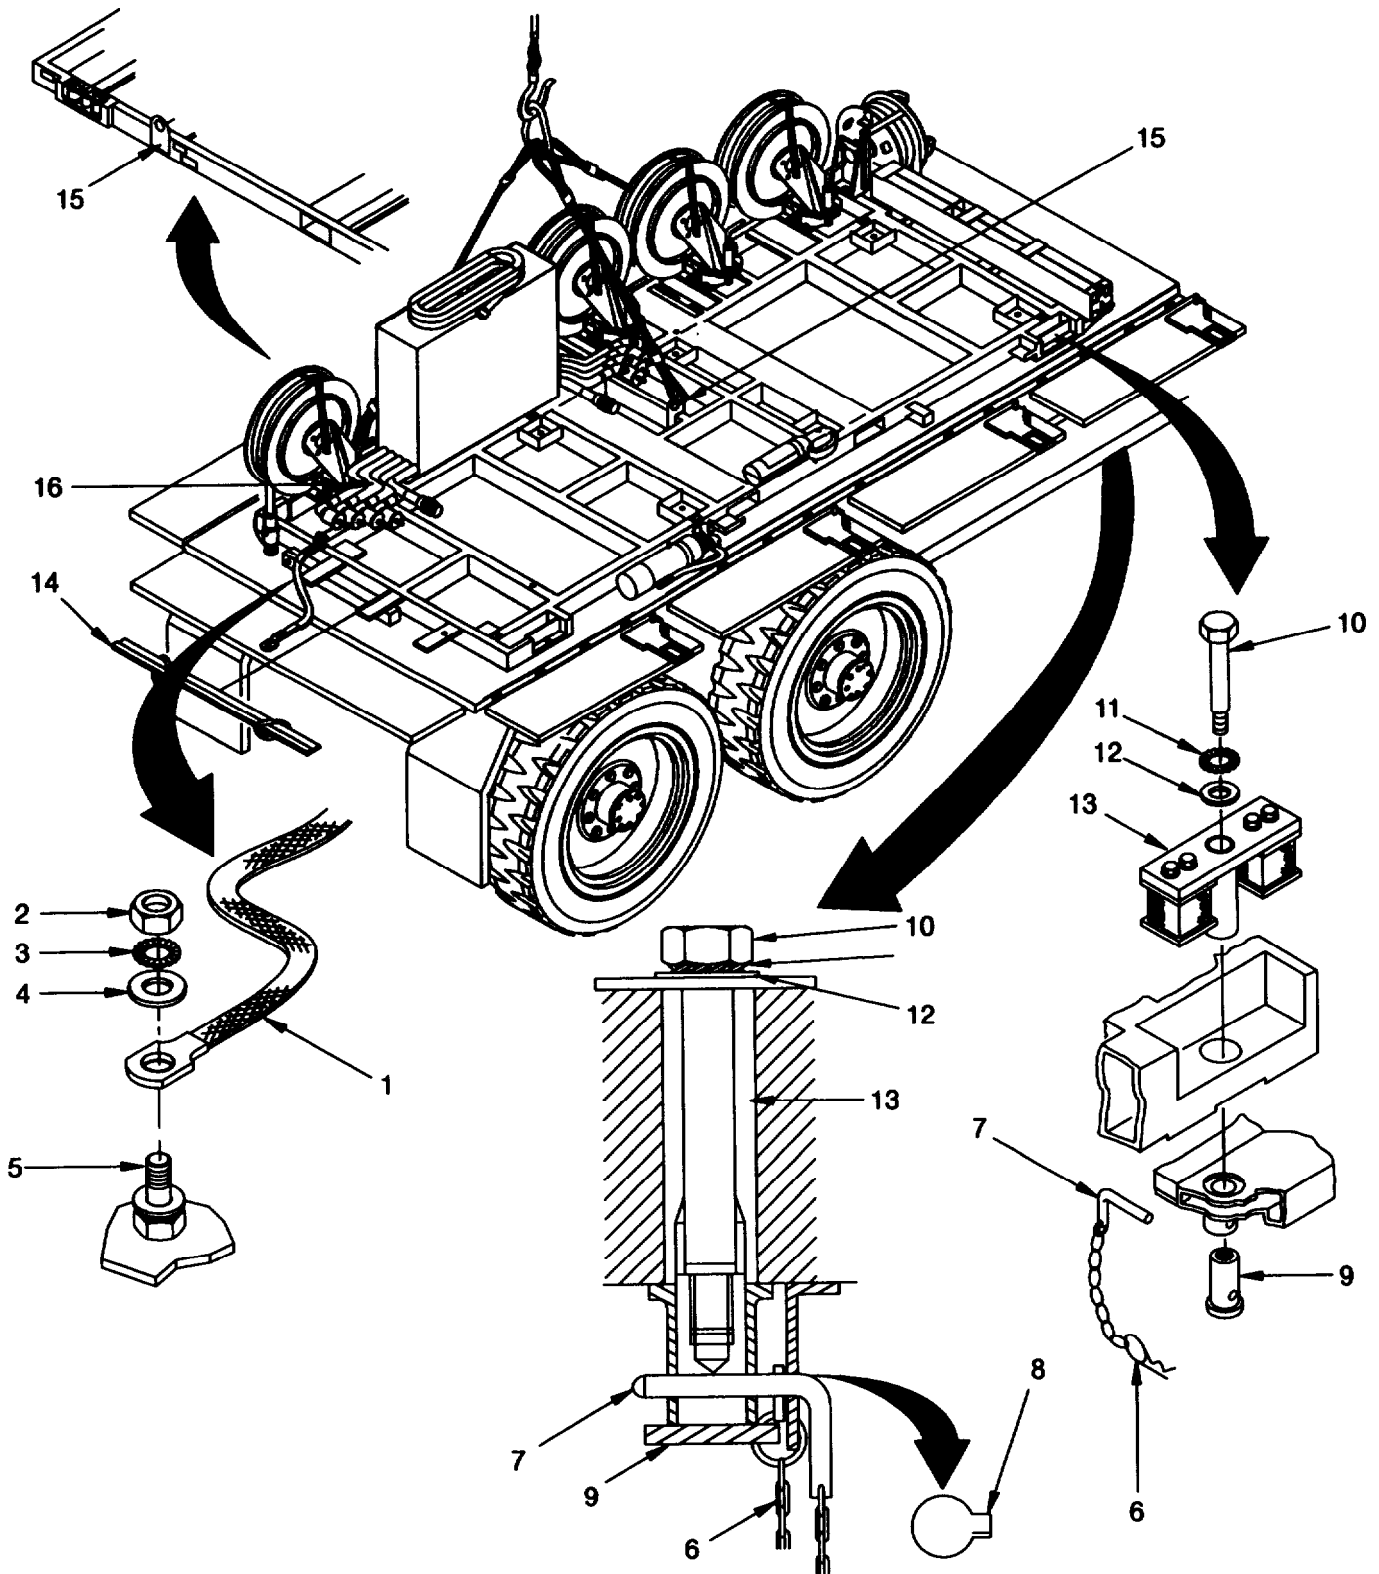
Removing the Pallet Frame from the Truck Bed wing a Crane.
